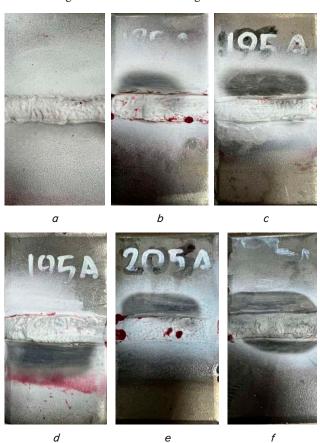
The results of the dye penetrant test: a — welding current 185 A without backing plate; b — welding current 185 A with backing plate; c — welding current 195 A without backing plate; d — welding current 195 A with backing plate; e — welding current 205 A without backing plate; f — welding current 205 A with backing plate
